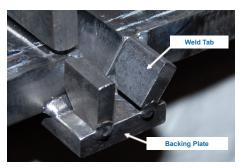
Weld tabs prior to welding. (http://awssection.org/syracuse/photo_large/january_19_2011)
